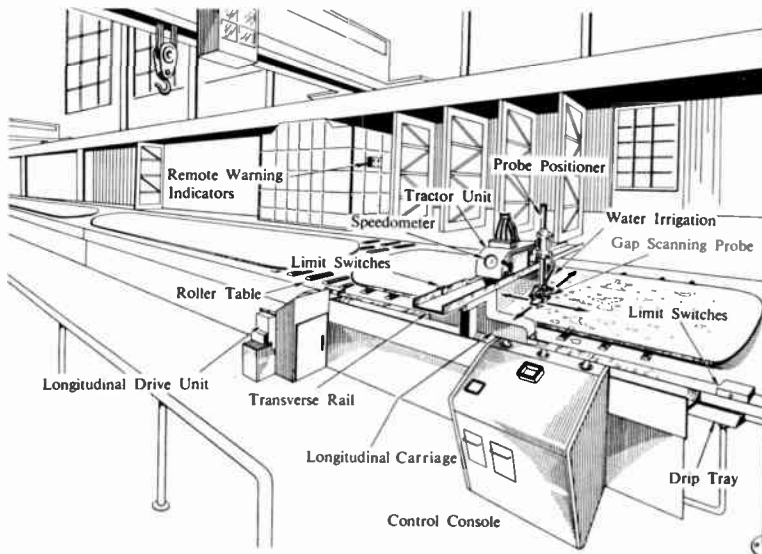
Sketch of equipment to inspect plate material on the roller table of a mill.
